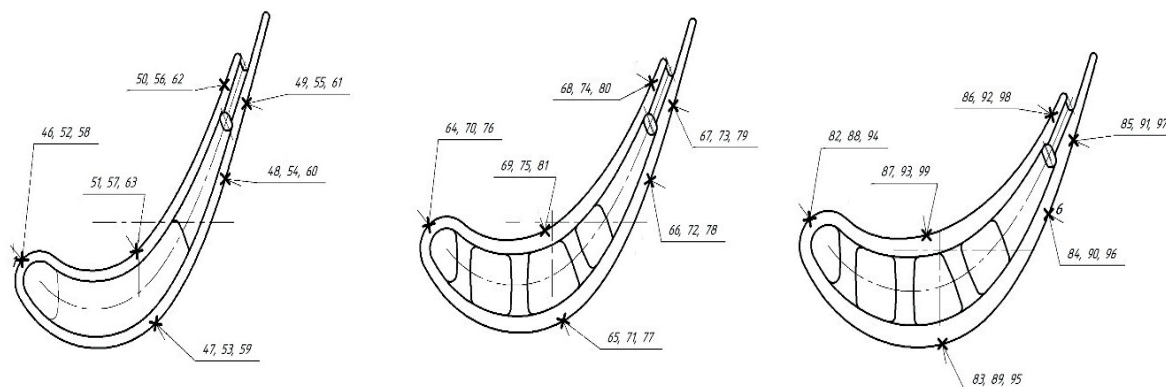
The layout for thermocouple instrumentation of the rotor blade profile on the metal side
